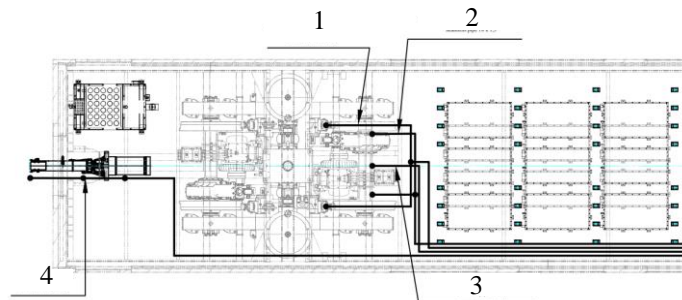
Pneumatic Piping Diagram Design on Motor Engine Combustion (side view)
